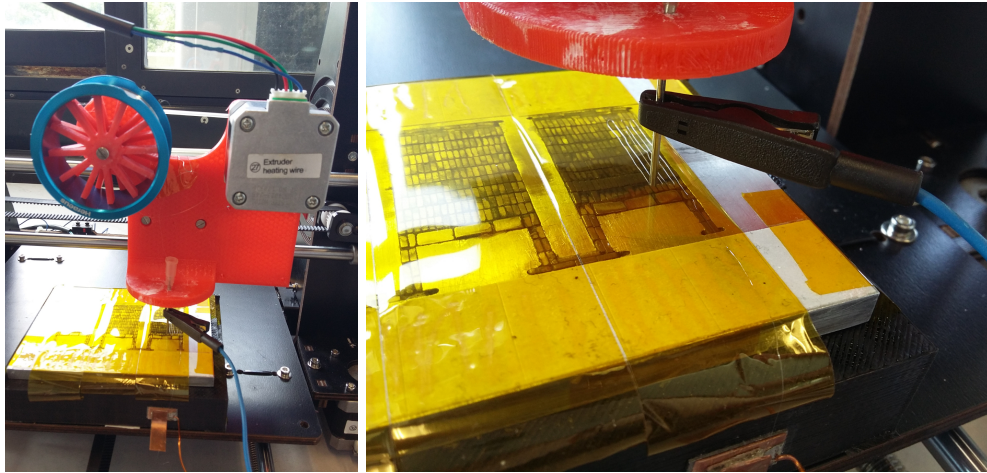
Customized holder for platinum wire coil, stepper motor, and hollow needle (left) and magnet arrays below the polyimide tape and some platinum wire windings on top of the polyimide tape (right)
